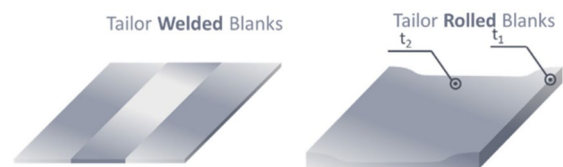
Tailor welded blank (TWB) and tailor rolled blank (TRB) [77]
